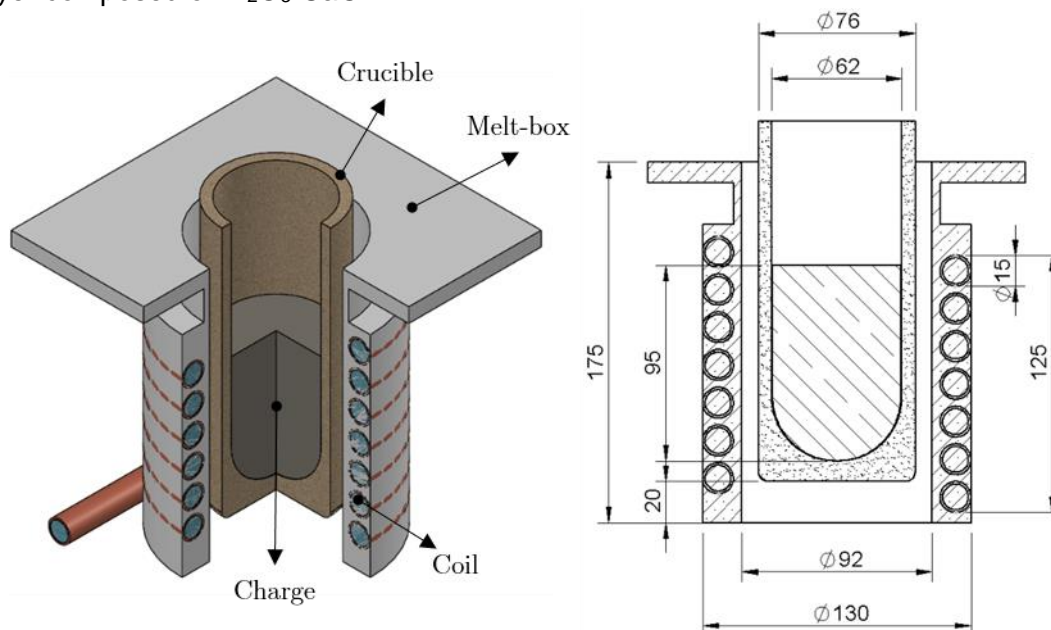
3D melt-box and section view of the geometry with principal dimensions.
